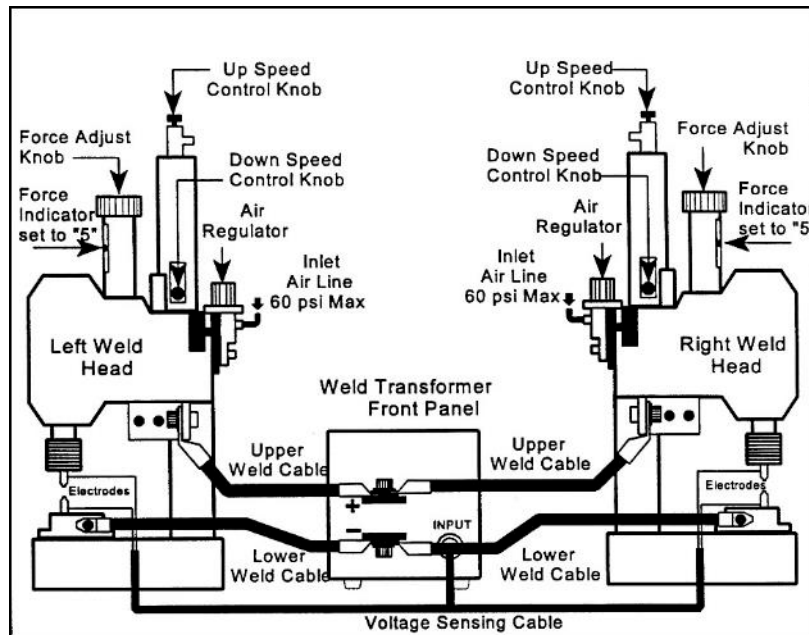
Weld Cable and Air Line Connections for Dual Air Actuated Weld Heads
